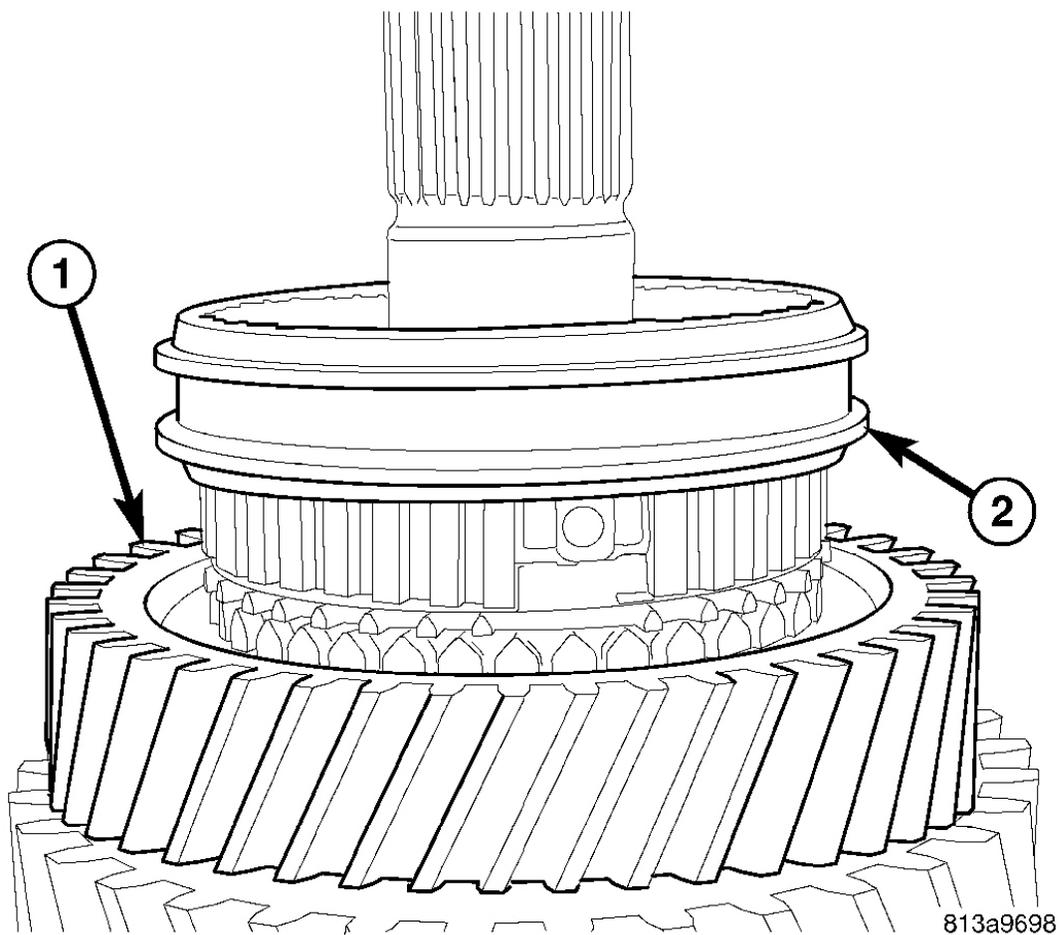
Identifying Reverse Gear & Synchronizer Sleeve
